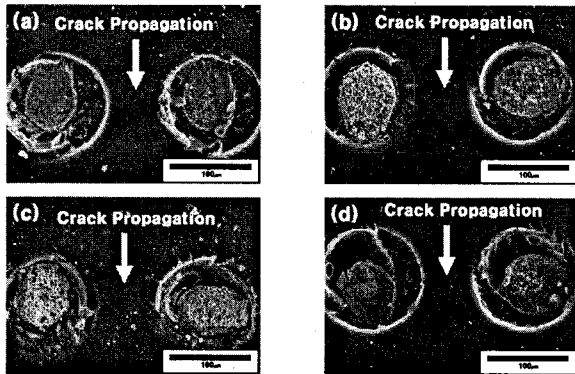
Fracture surface of Sn-2.5Ag solder bump after the Flip Chip shear test
